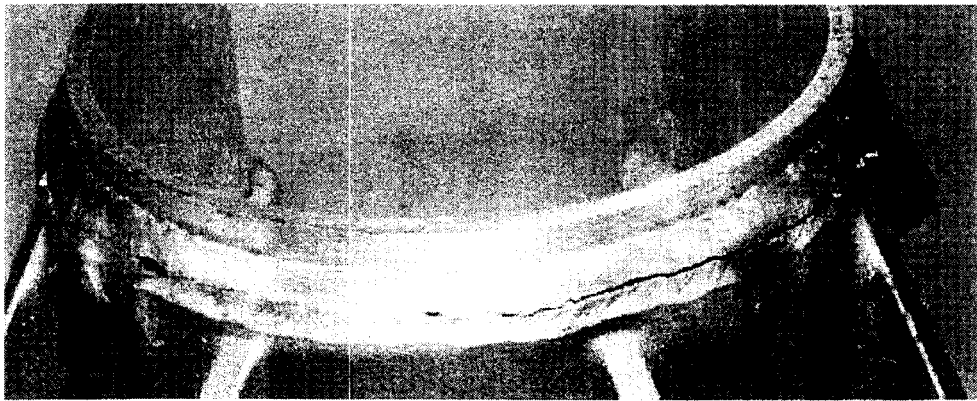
Typical Fatigue Crack that Propagates Through the Weld Throat
